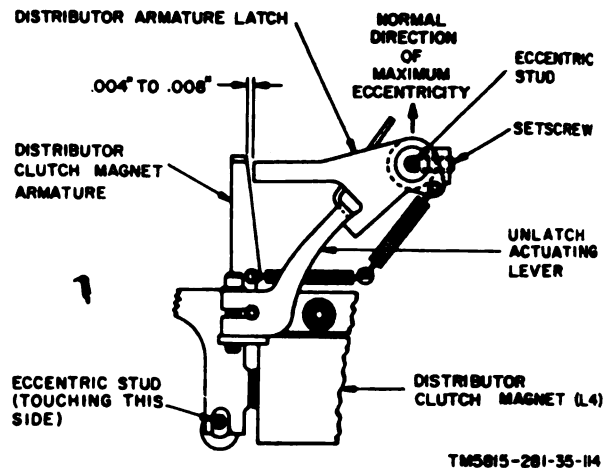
Distributor clutch magnet armature latch eccentric stud adjustment requirement.
